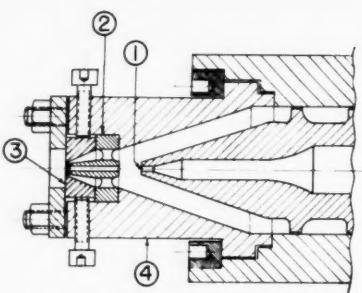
Die and Guider Tube for Straight Head Jacketing
